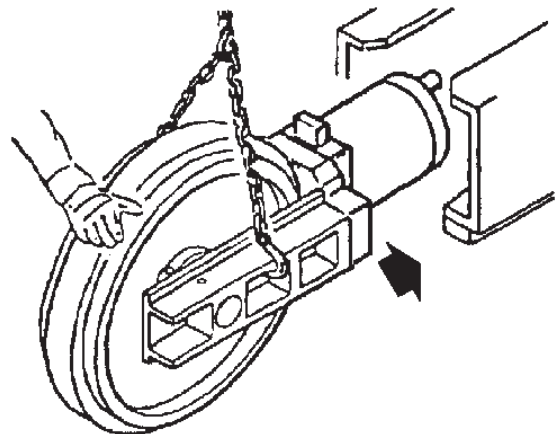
Install Assembled Idler Unit into Track Frame.
